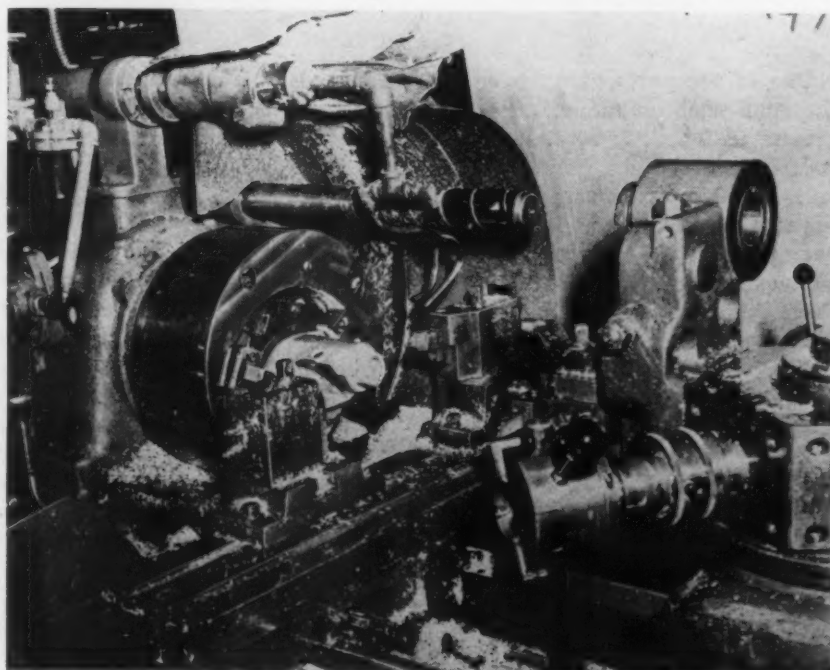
Cover castings are machined on Potter & Johnson turret lathes. Double tooling on the six-face chuck is employed.
